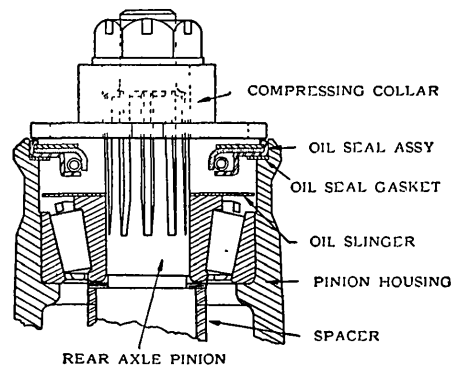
Using compressing collar to install drive pinion oil seal. 1935-52
